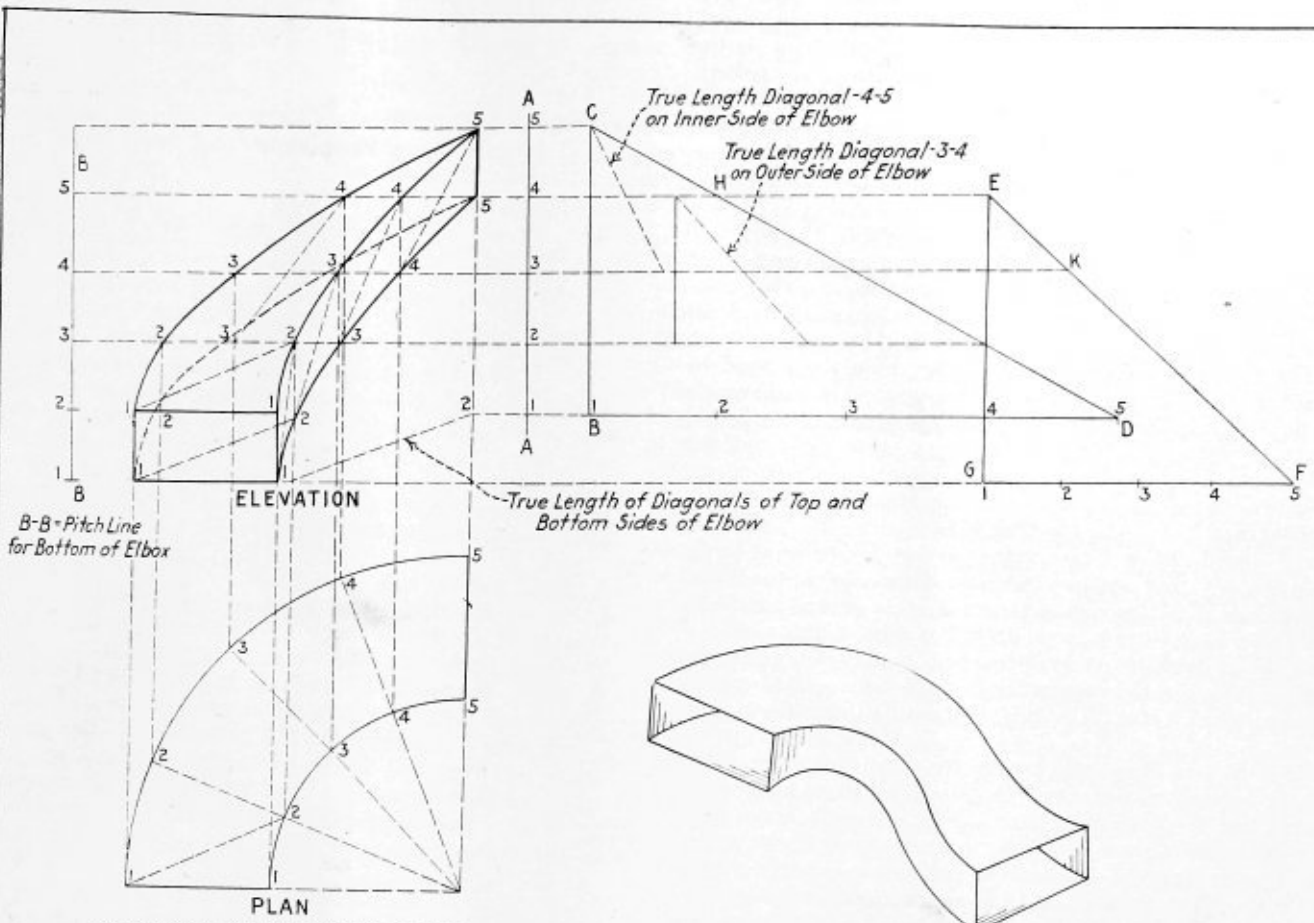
PLAN AND ELEVATION OF ELBOW
